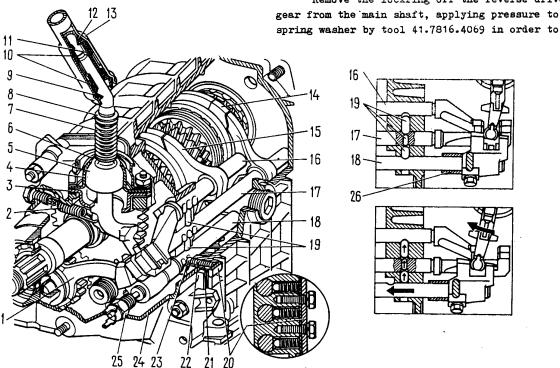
Gearbox Control Mechanism: 1 - reverse shift fork; 2 - gearshift lever retracting spring; 3 - gearshift lever guide seat; 4 - lever ball support; 5 - gearshift lever; 6 - spherical washer; 7 - lever spring; 8 - lockring; 9 - locking bushing; 10 - flexible bushings; 11 - spacer bushing; 12 - thrust pad; 13 - gearshift lever shank; 14 - 3rd and 4th speed shift
